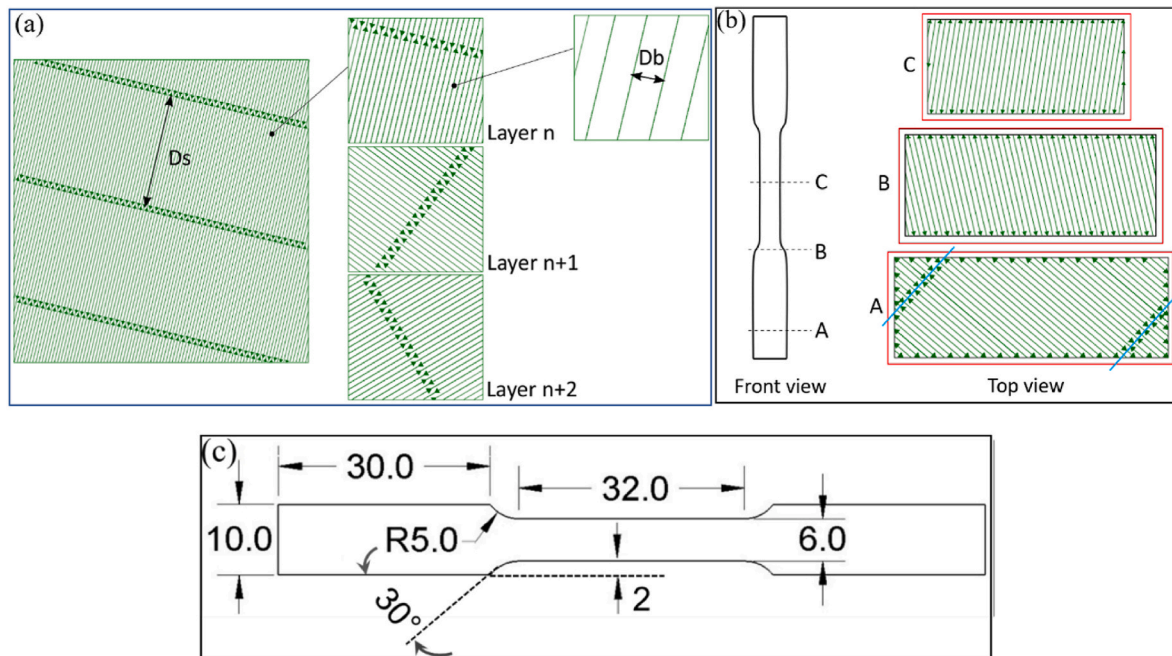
Details of the process for specimen fabrication: (a) schematic of the exposure strategy; (b) exposure patterns for selected cross-sections of the specimen; (c) engineering drawing of the specimen (in agreement with ASTM E8/E8M – 09 [39], dimensions are in mm); the nominal thickness of the specimens is 4 mm.
